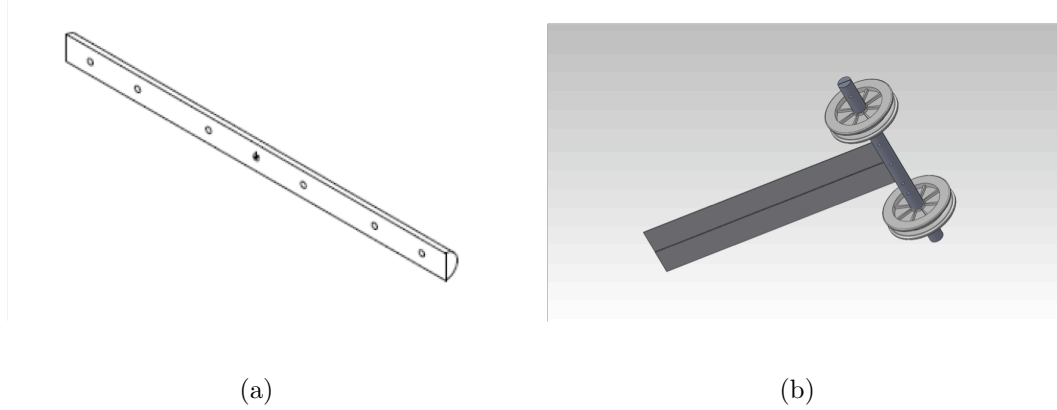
CAD illustrations of tip pulley clamp setup: (a) Stainless steel half-moon rod used to clamp pulleys to tip of sample. (b) Solidworks depiction of center pulley and tip clamp setup.
